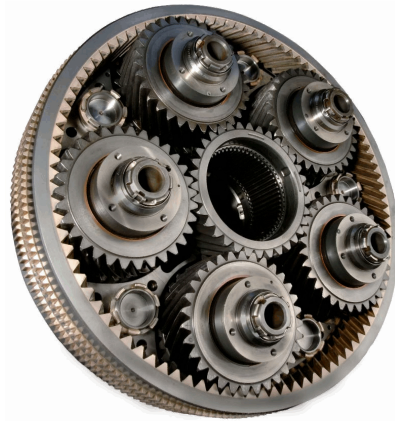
The power gearbox of the Pratt&Whitney PurePower family engines.[25]
